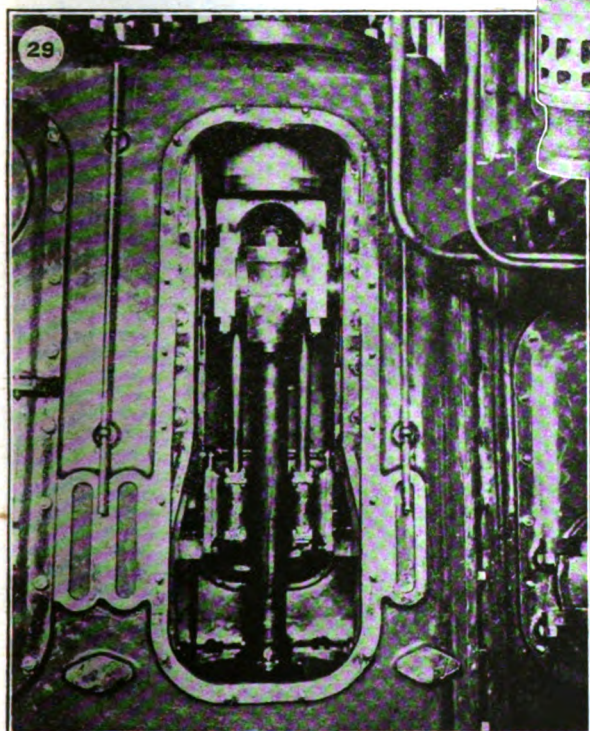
Sectional construction of crank-case—Fig. 27—Automatic shutter-type connecting rod assembly—Fig. 28—Cylinder rotary valve chest—Fig. 29—Front view of connecting rod assembly—Fig. 30—Cylinder liner, cylinder jacket and cylinder head—Fig. 31—Piston and piston-rod assembly.
